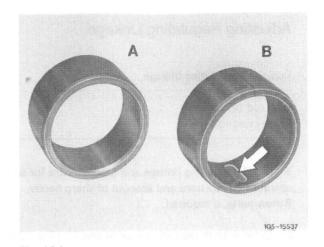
A Former rear bearing bushing B Present rear bearing bushing
